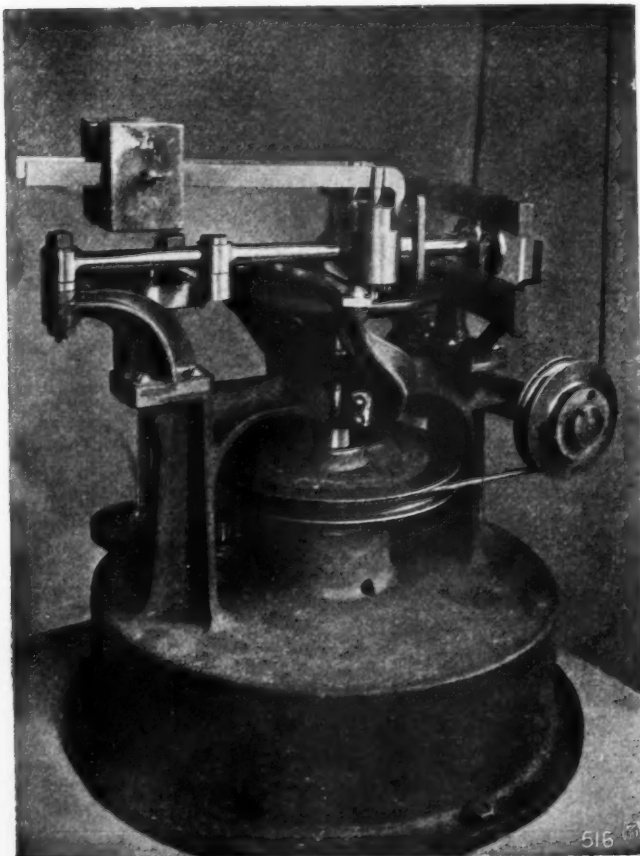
Machine used in S. K. F. laboratory for wear tests by direct grinding
